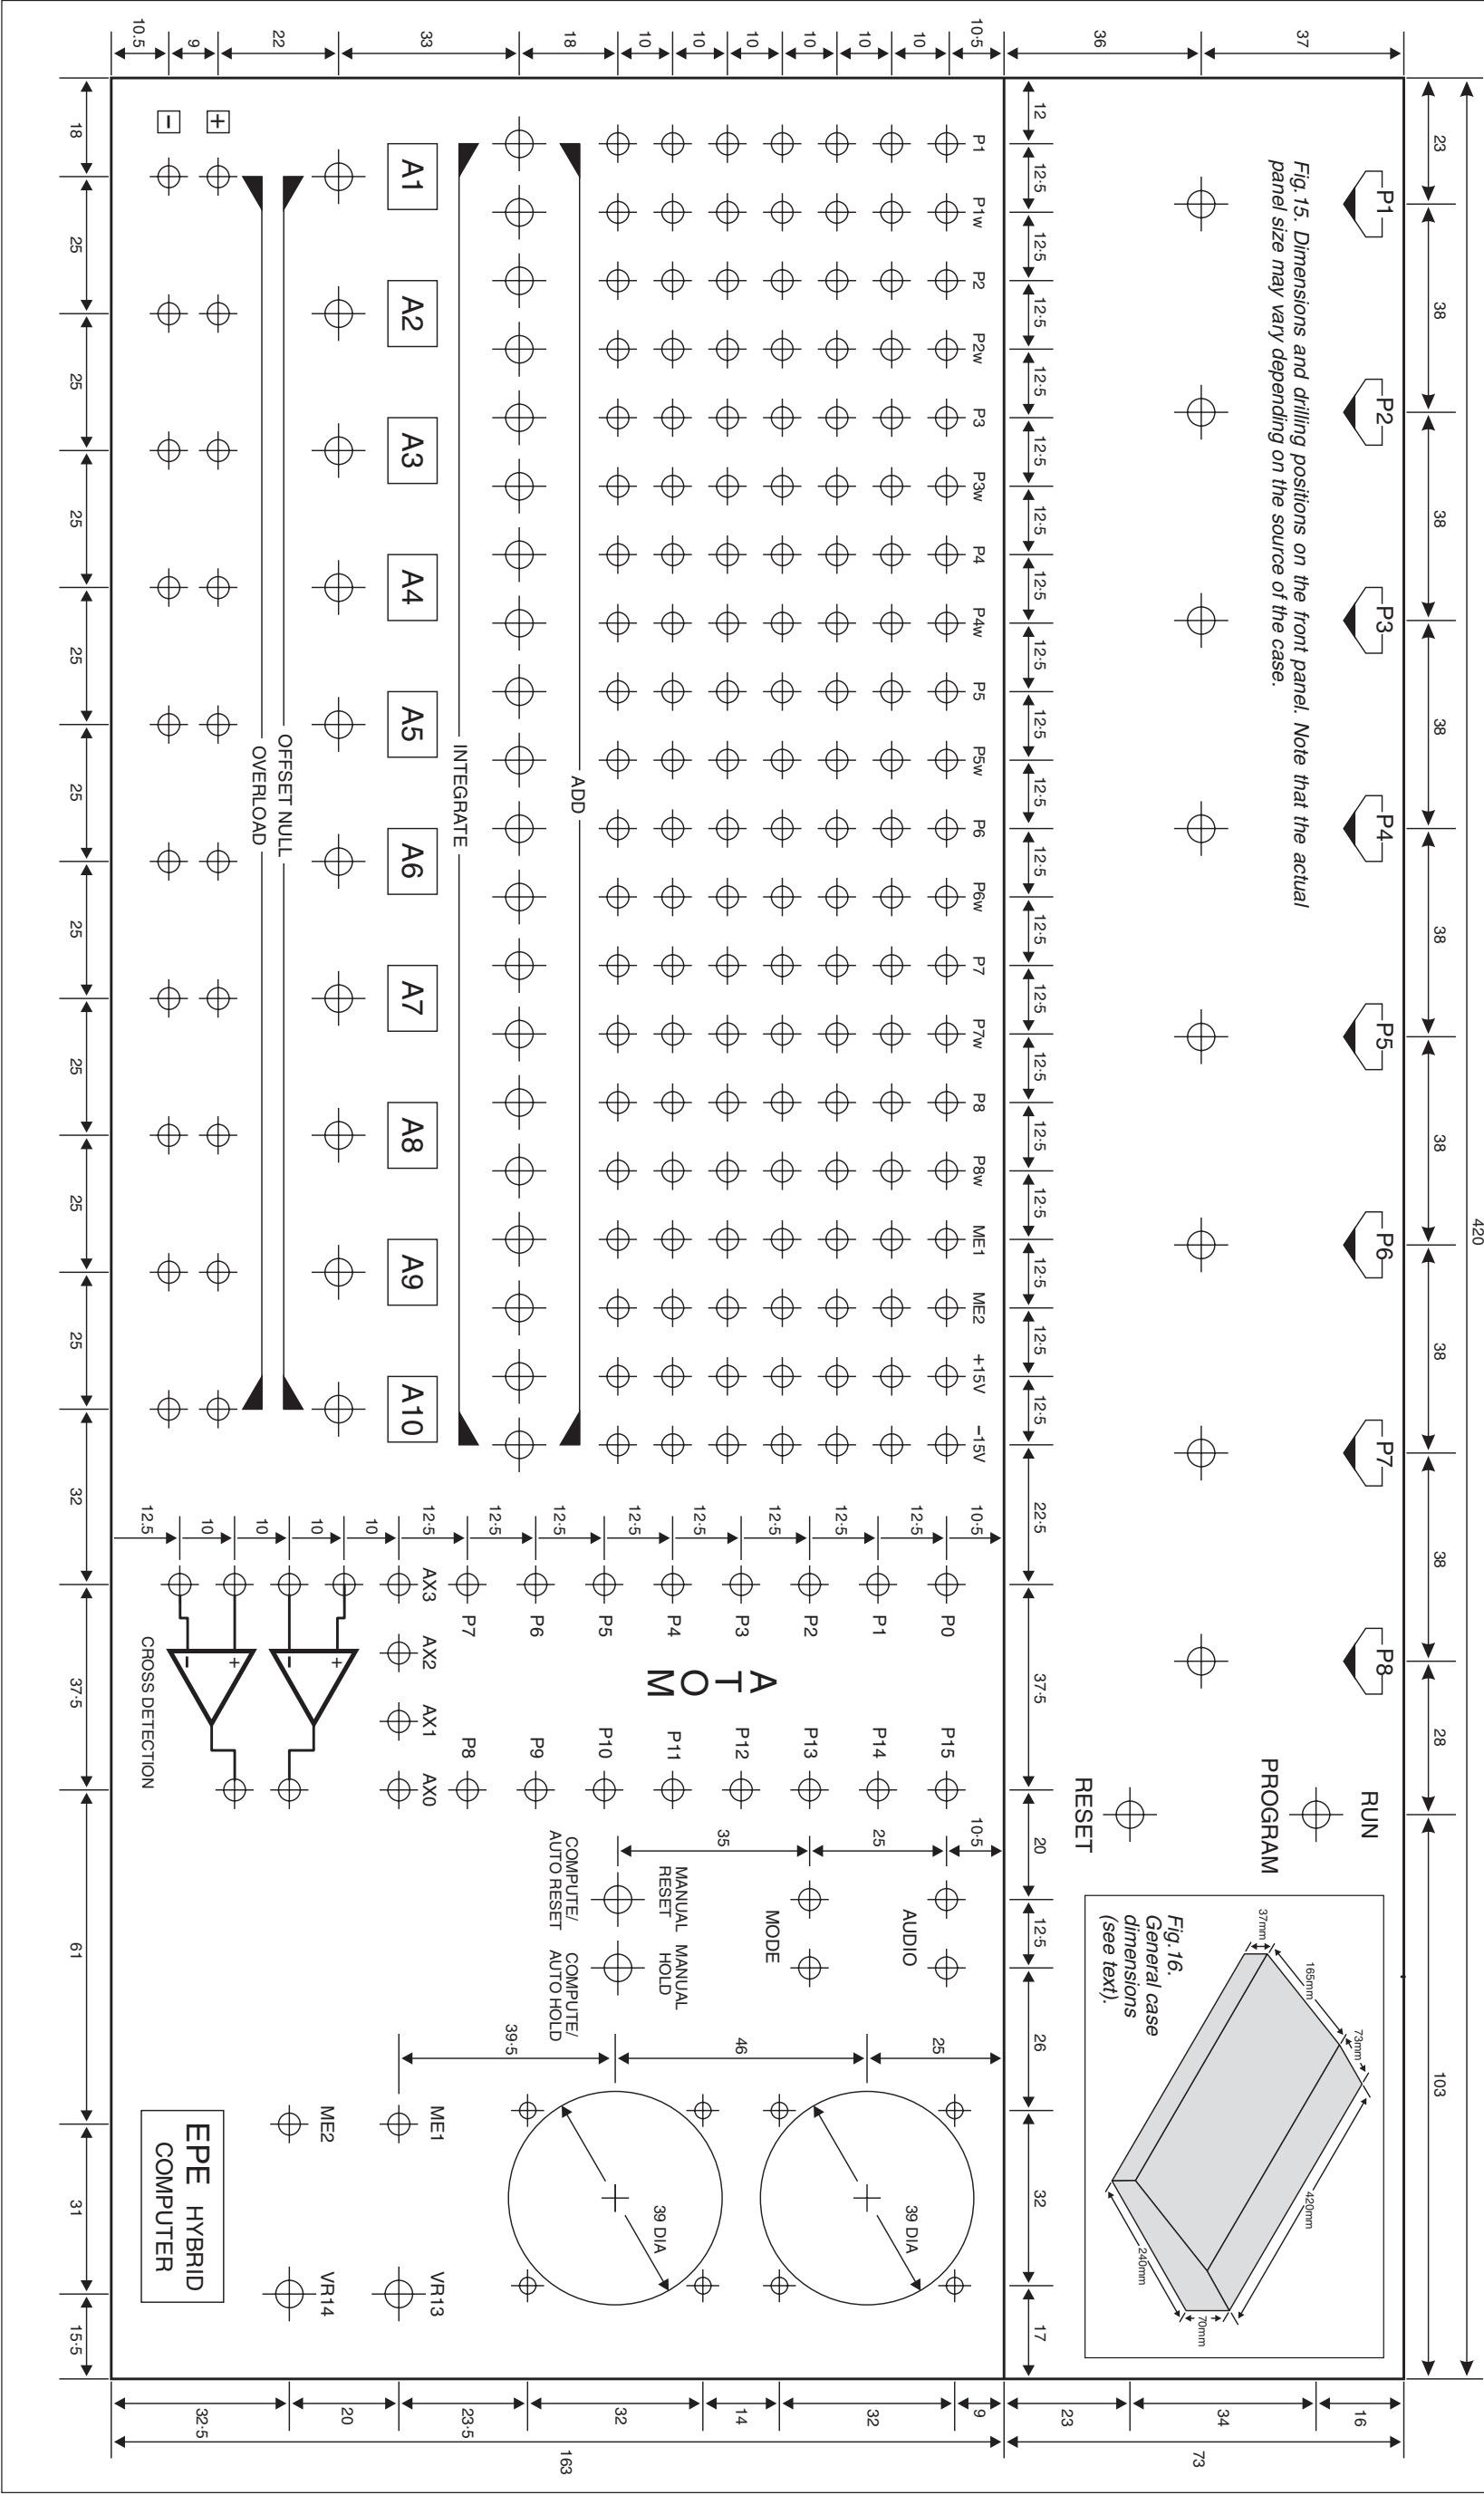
Dimensions and drilling positions on the front panel. Note that the actual panel size may vary depending on the source of the case.
